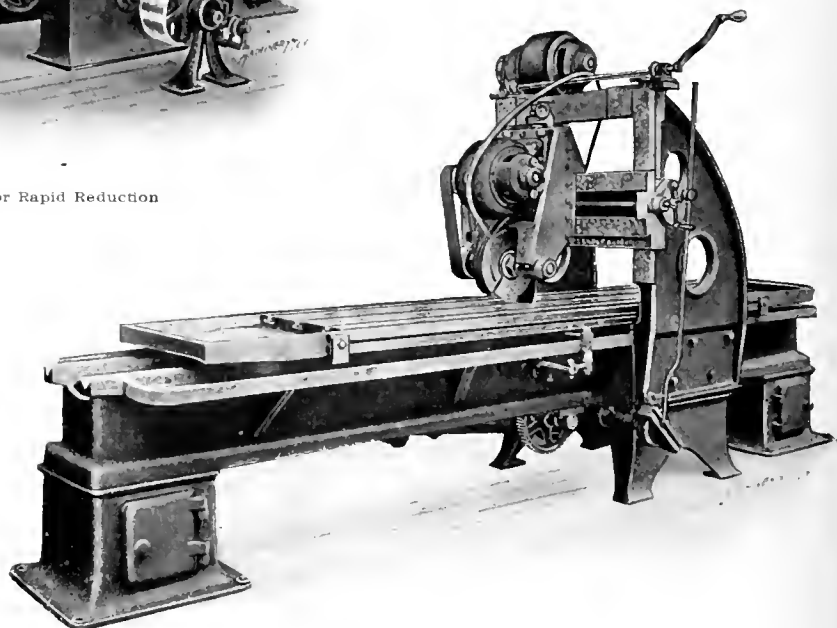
Plain Type Surface Grinder with Self-contained Motor Drive
